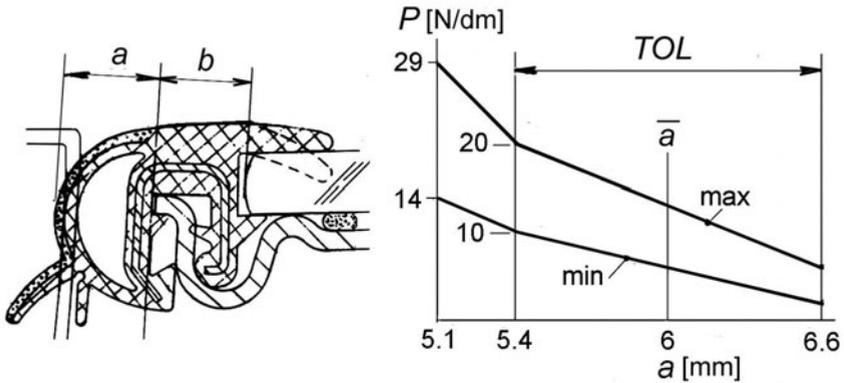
Sliding roof seal section and related lift P specification. a , b : critical values; TOL : sliding roof-roof housing play tolerance.
